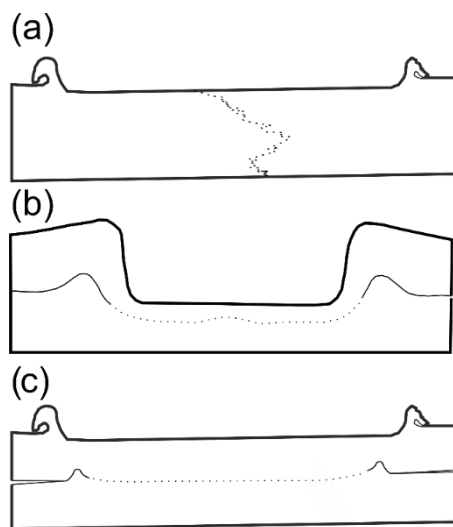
Schematic of the weld configurations: (a) FSW butt joint obtained with a conventional tool with a pin; (b) FSSW lap joint obtained with a conventional tool with a pin; (c) FSSW lap joint obtained with the pin-less tool.
